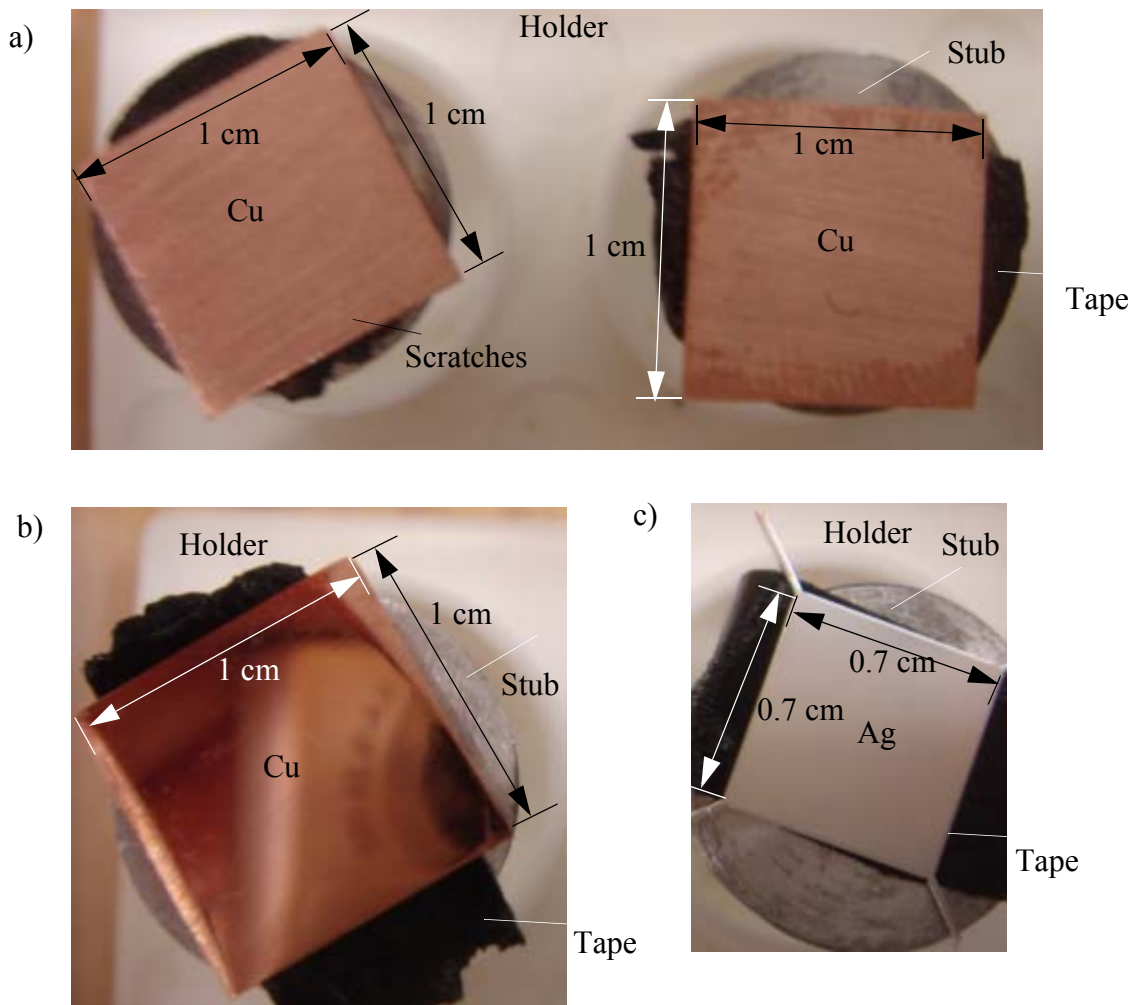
Roughness measurement samples of a) Cu after sanding with 500 grid sand paper, b) Cu after standard grinding and polishing, and c) standard Ag bondpad.
